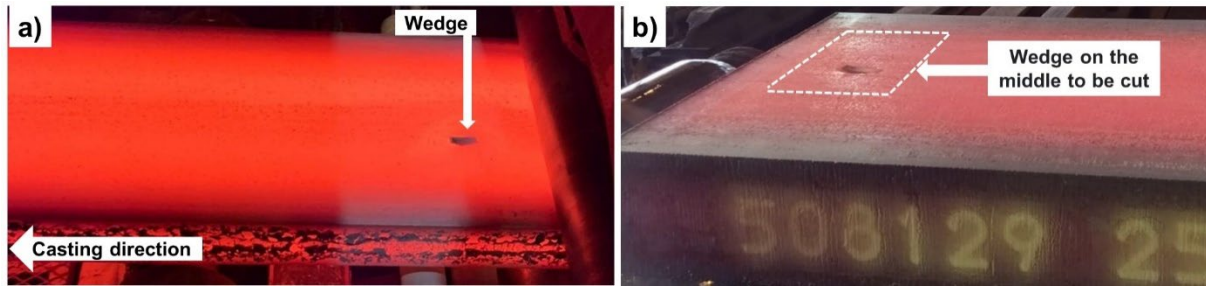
Wedge view at a) end of casting machine and b) after slab cutting.
